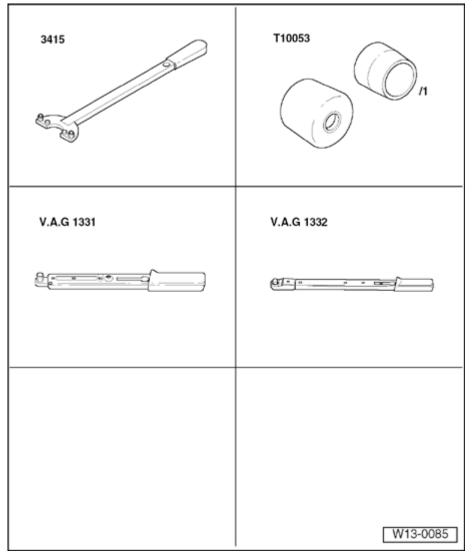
Identifying Special Tools - Removing And Installing Sealing Flange (Belt Pulley Side)
